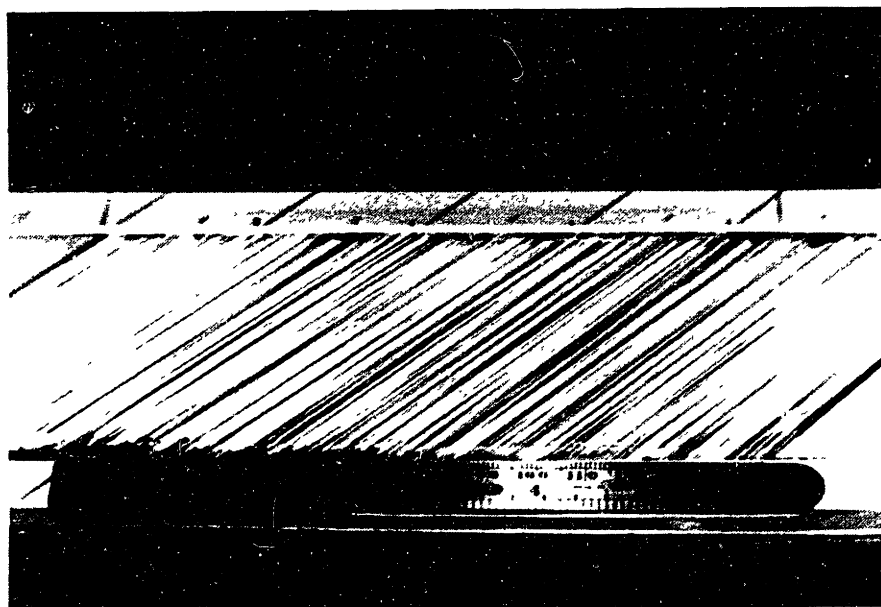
Completed mold assembly containing fibers ($x_2=0.5$).
